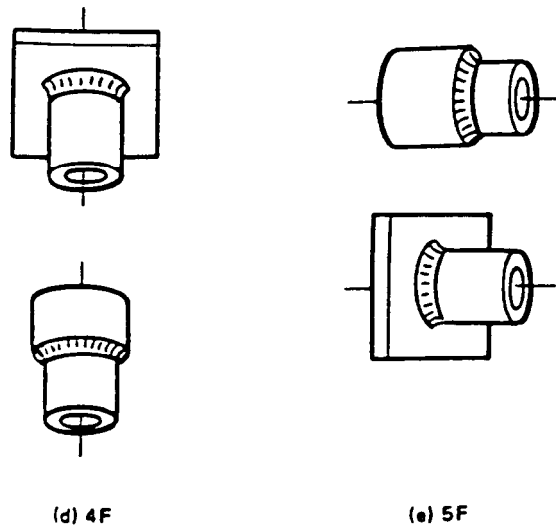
(continued) - Fillet Welds in Pipe, Test Positions
